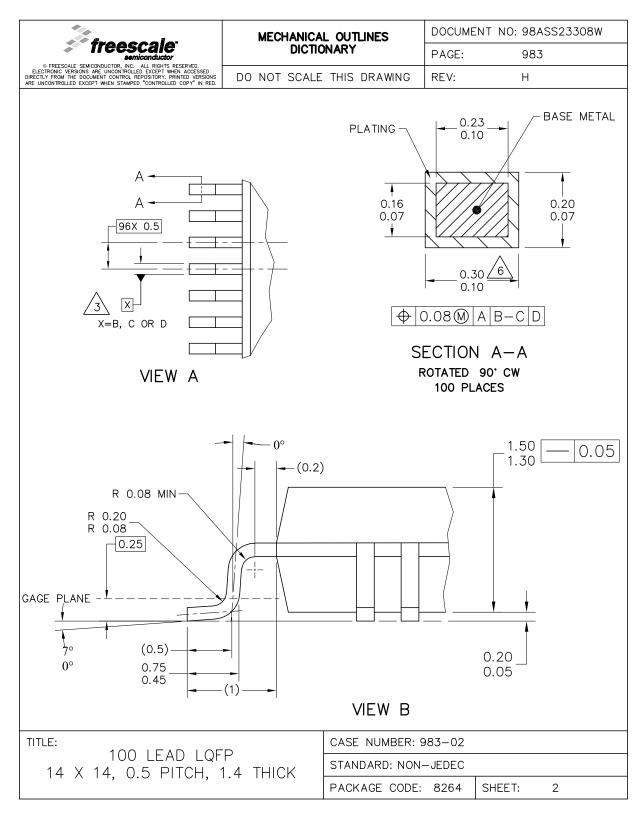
100 LQFP package mechanical drawing (Part 2 of 3)
